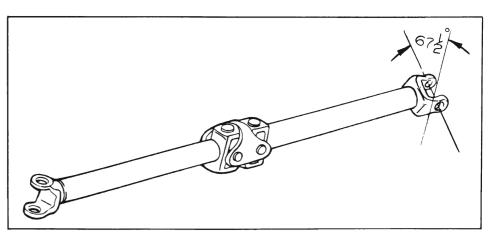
Propeller Shaft Phasing—4400-4600-4800 Series
